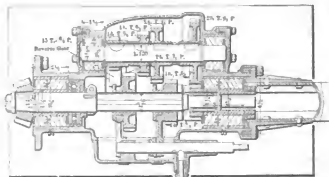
Regal transmission gear, showing compactness, and Hyatt nickel steel roller bearings
